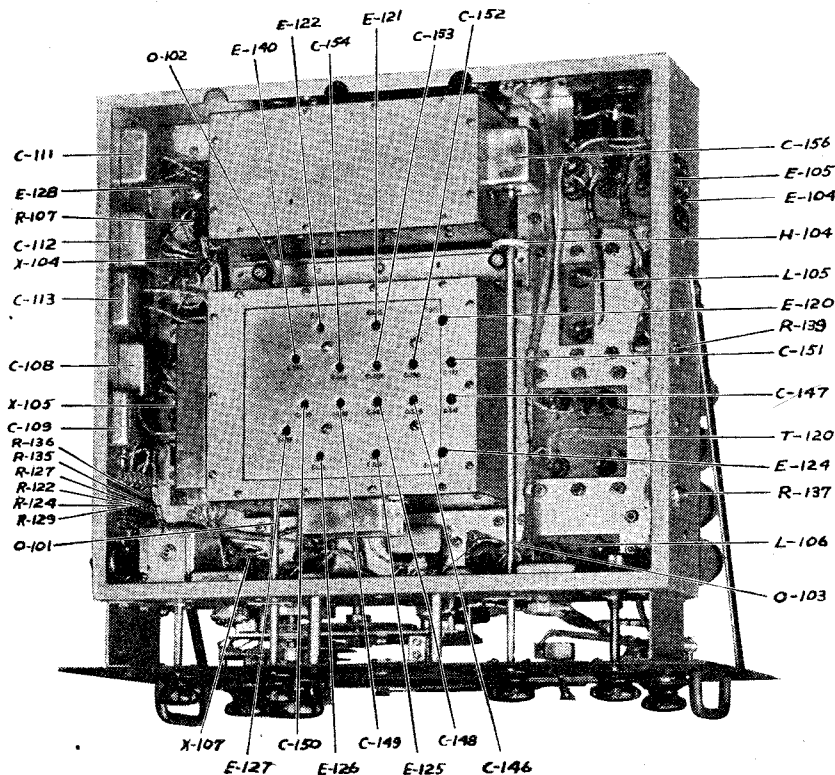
LEFT BOTTOM OBLIQUE VIEW, RADIO RECEIVER CHASSIS
